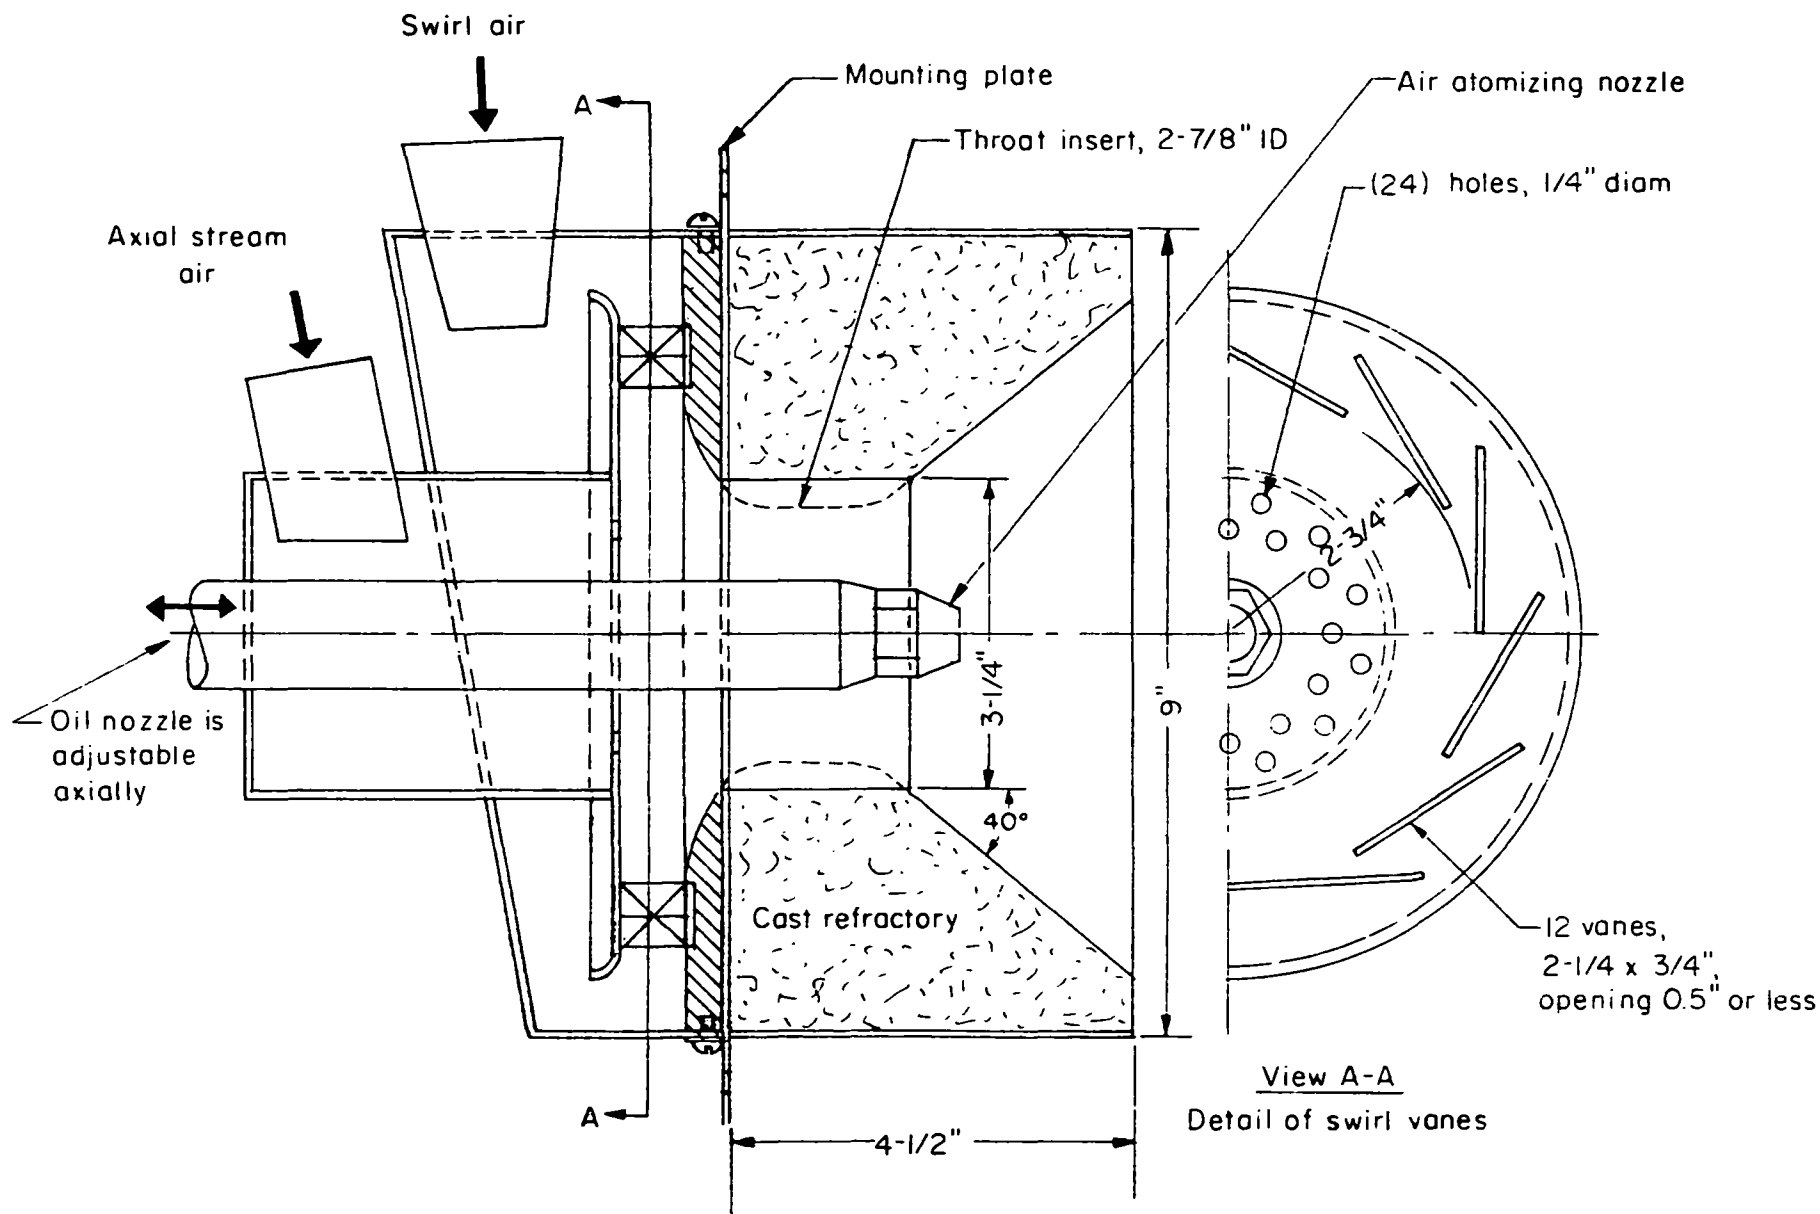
DETAIL OF BURNER FOR COMBUSTION RIG
